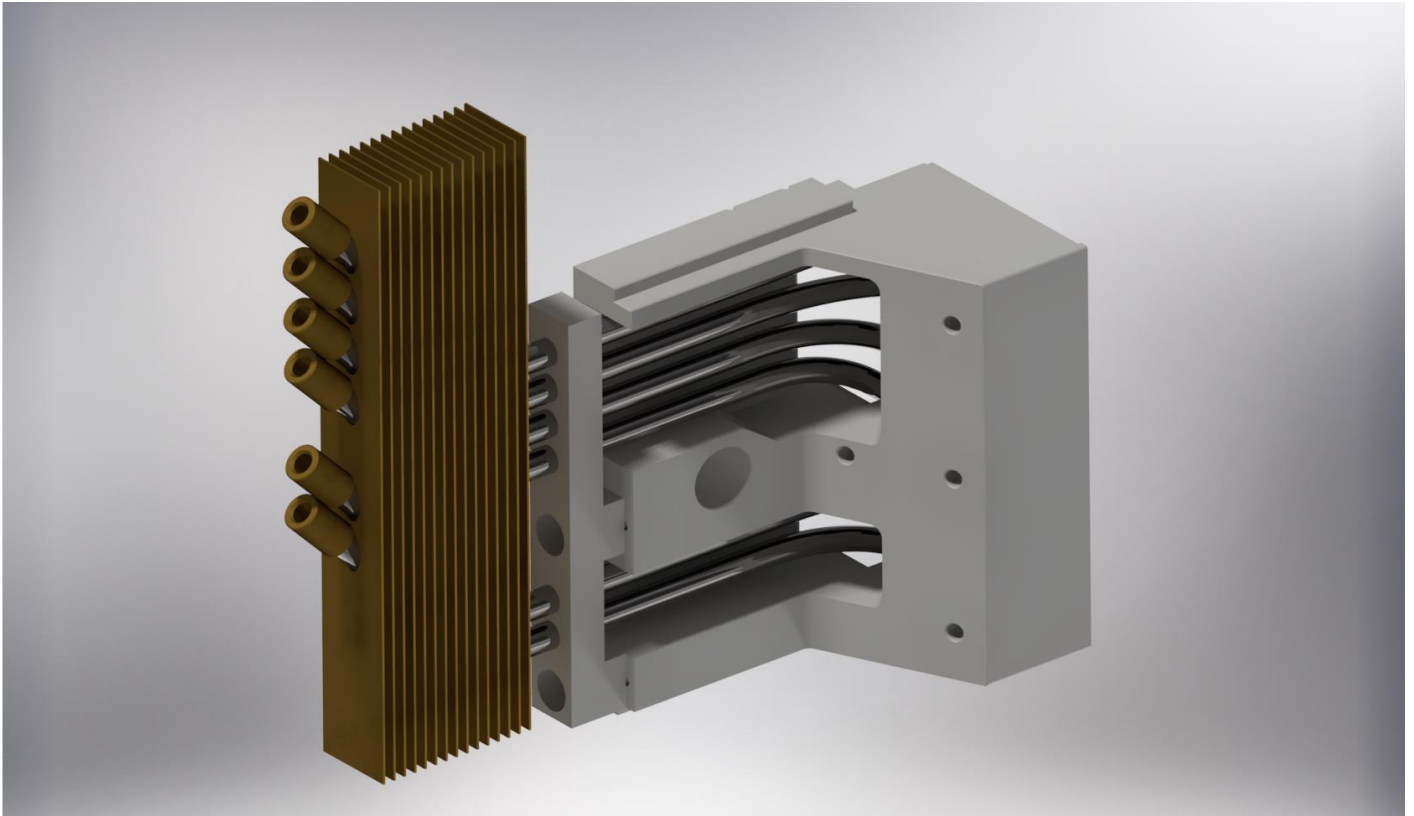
Figure 2: CAD concept of a convectively cooled heat sink on a heat pipe mould-element
